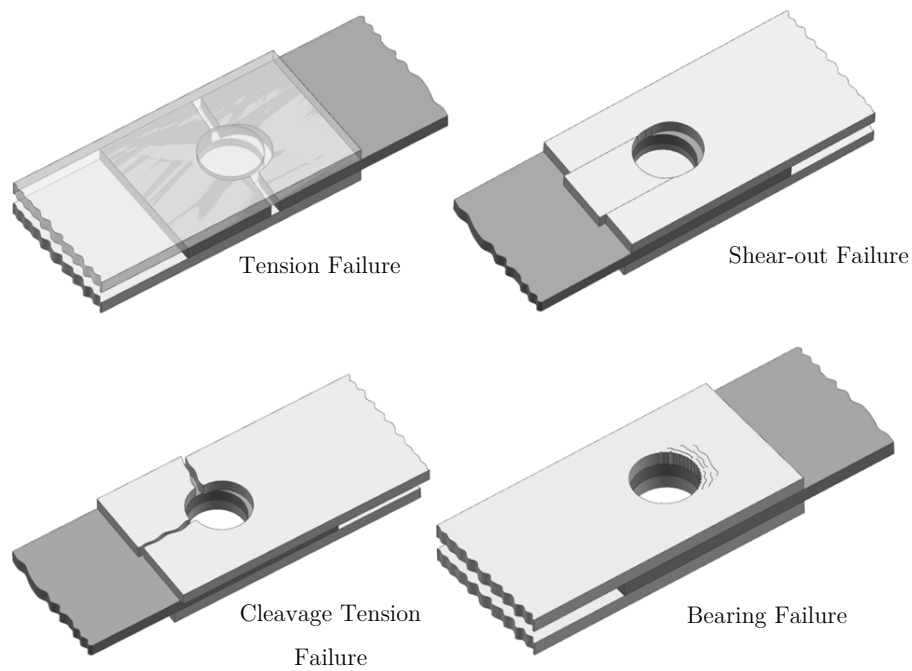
Failure modes for bolted joints used with composite laminates
